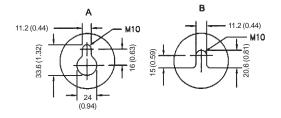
Size 9 - Dimensions in mm (inch)
